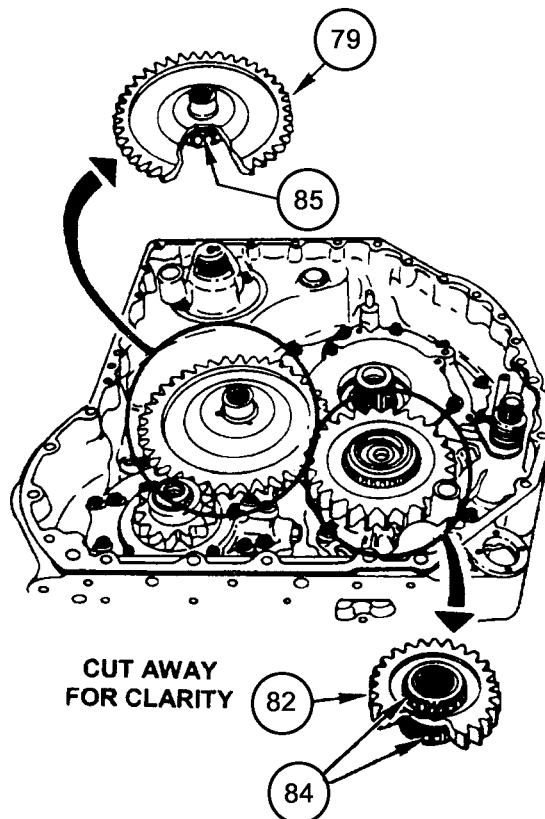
Range Output Gears, Steer Shaft Drive Gear and Replacement Bearings.
